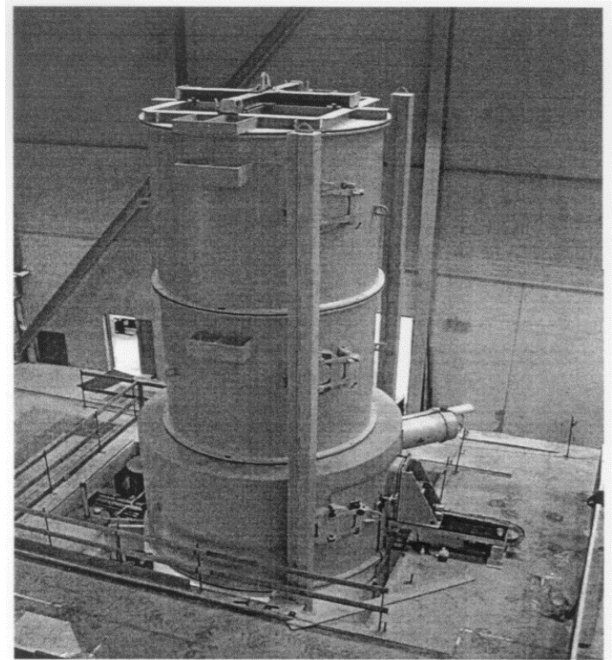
Picture of electron beam welding "hypermachine" for large rocket booster cases (during installation)
